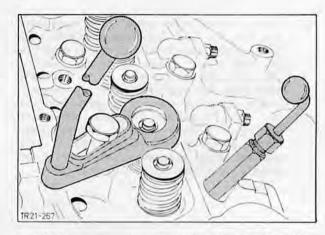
Removing valve spring with Special Tools 21–056 and 21–057
